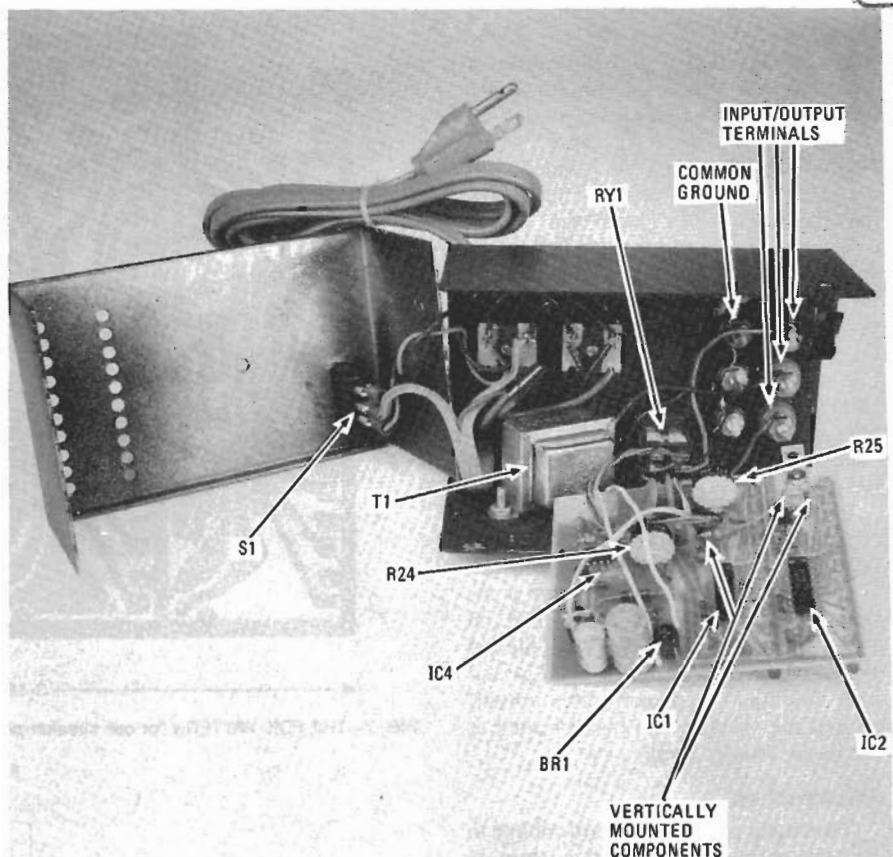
INSIDE THE UNIT. Note that several components are vertically mounted on the PC board.
